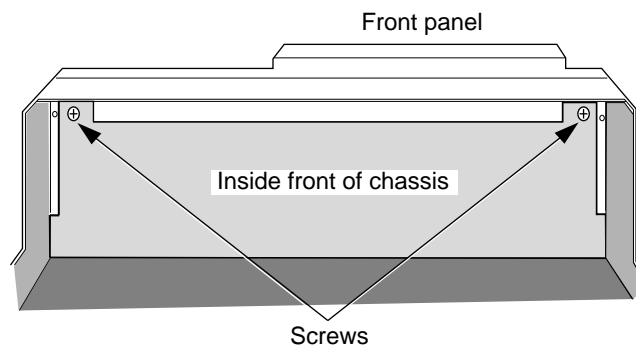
Front Panel Screws on 4-Slot Chassis
